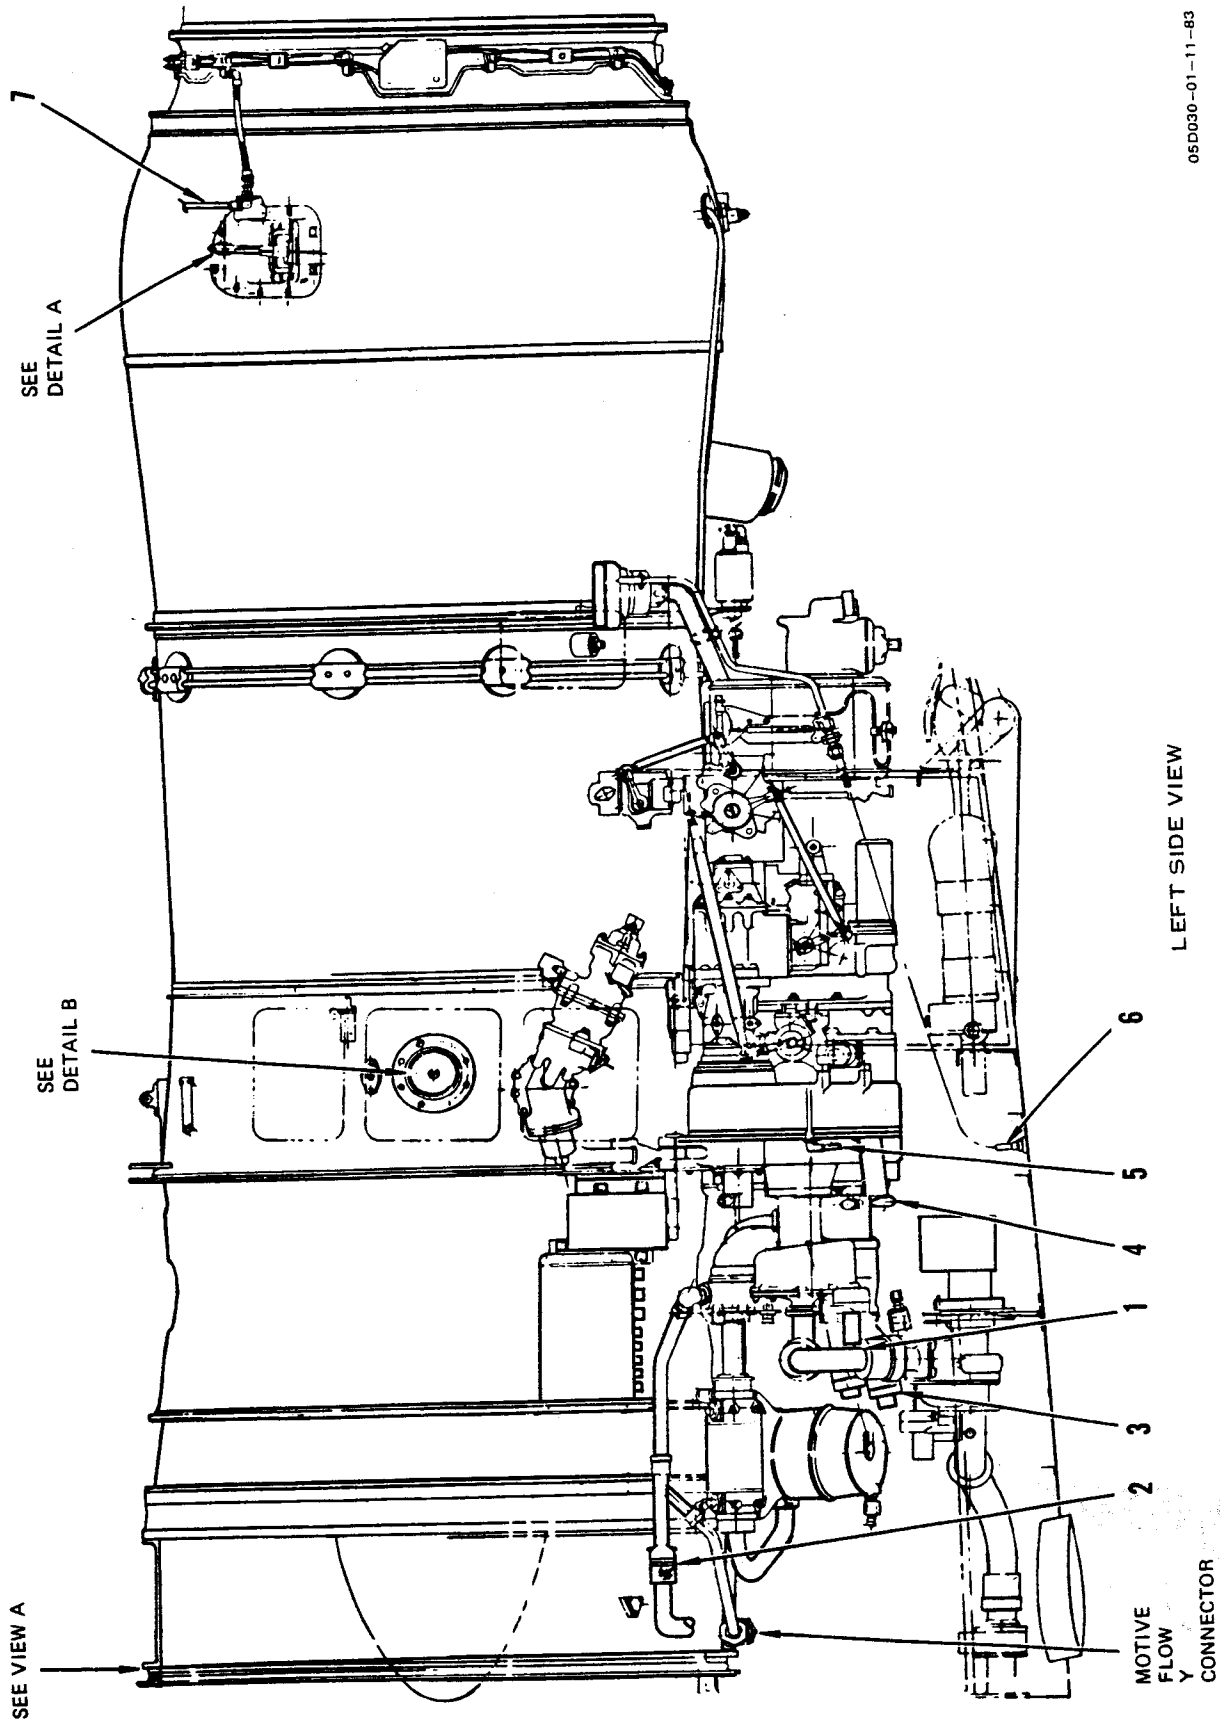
Removal and Installation; Engine (Sheet 1 of 5)
